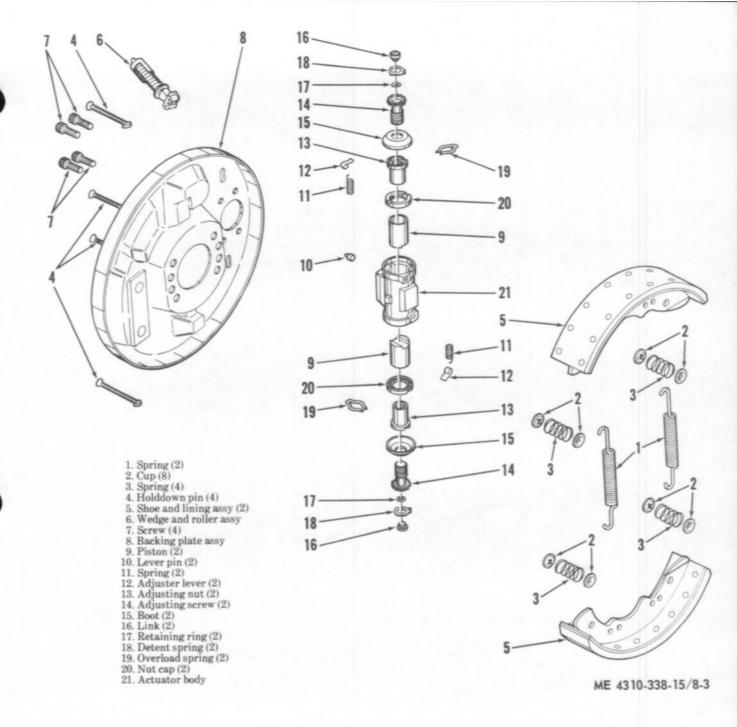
Wedge brake assembly; disassembly and reassembly.
